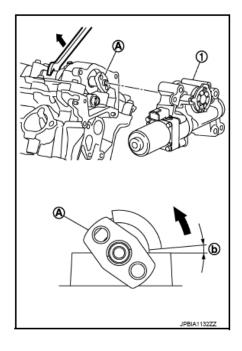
Holding Control Shaft Using Wrench Courtesy of NISSAN NORTH AMERICA, INC.
